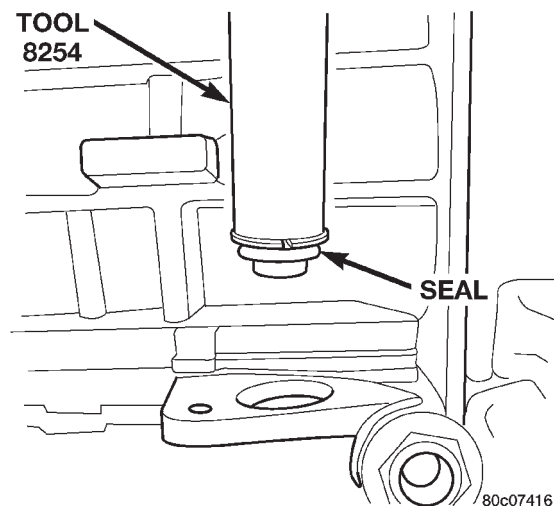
Install Dipstick Tube Seal Using Tool 8254
